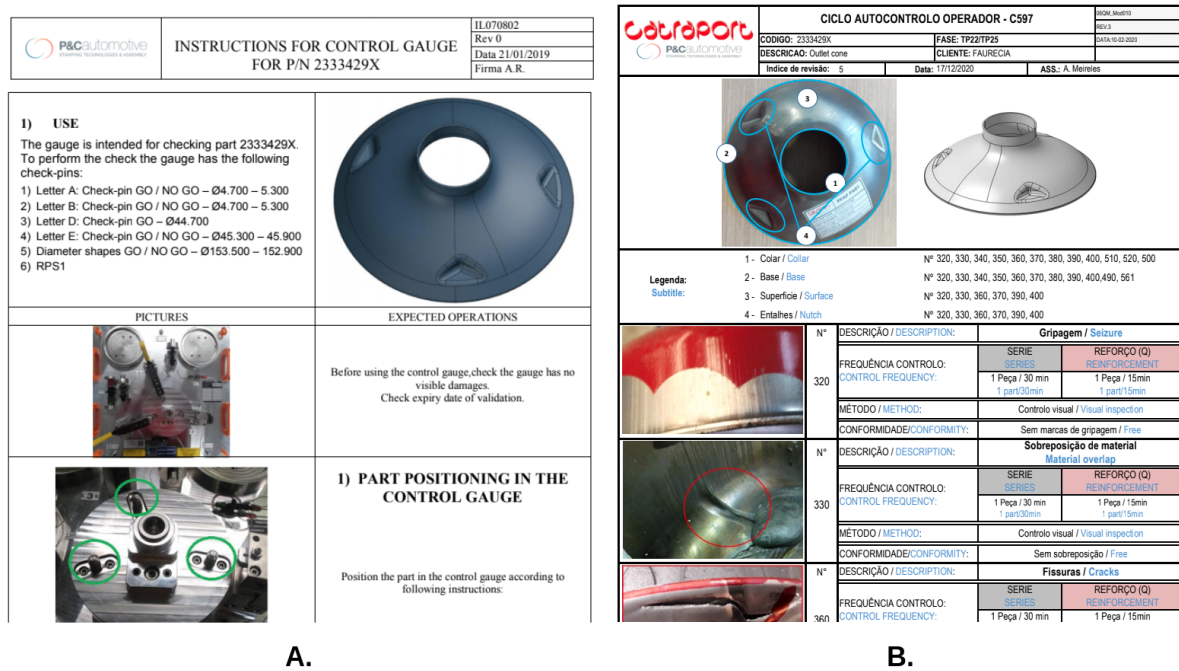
Guides used by operators during the inspection: Test bench usage guide (A); Operation control guide (B)
